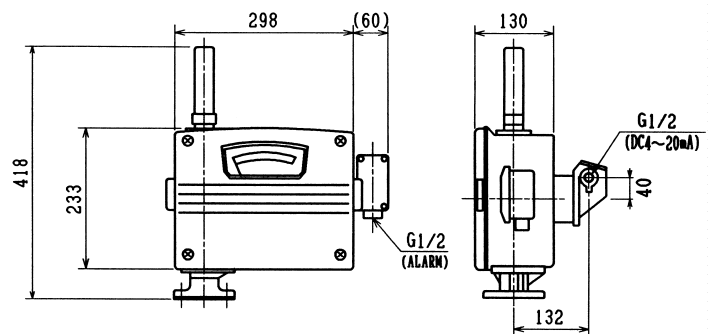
Indicator and transmitter assembly (FS-517S)
